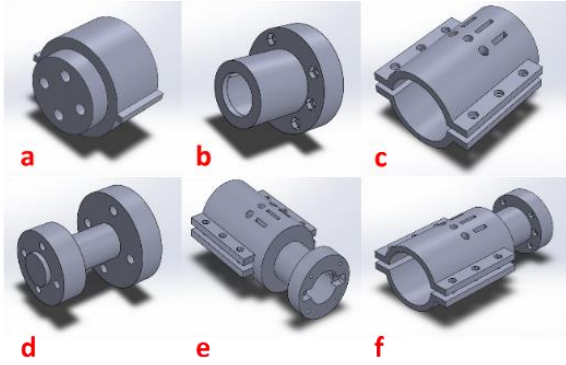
a: Load cell front cover design, b: Load cell outer sheath design, c: Drill motor outer sheath design, d: Load cell and robot attachment design, e: Drill holder design for robot assembled, f: Drill holder design for robot assembled version.
